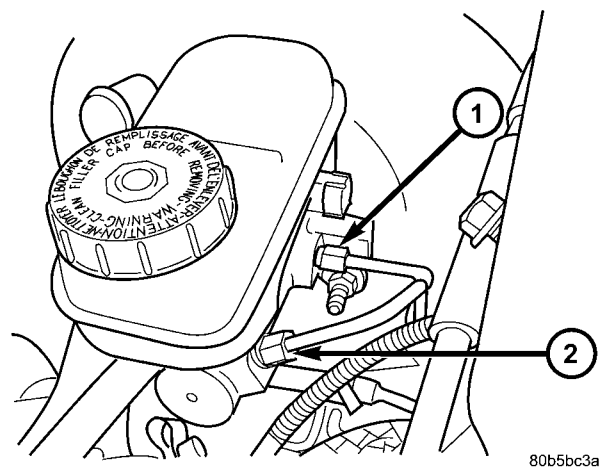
PRIMARY AND SECONDARY BRAKE TUBES
